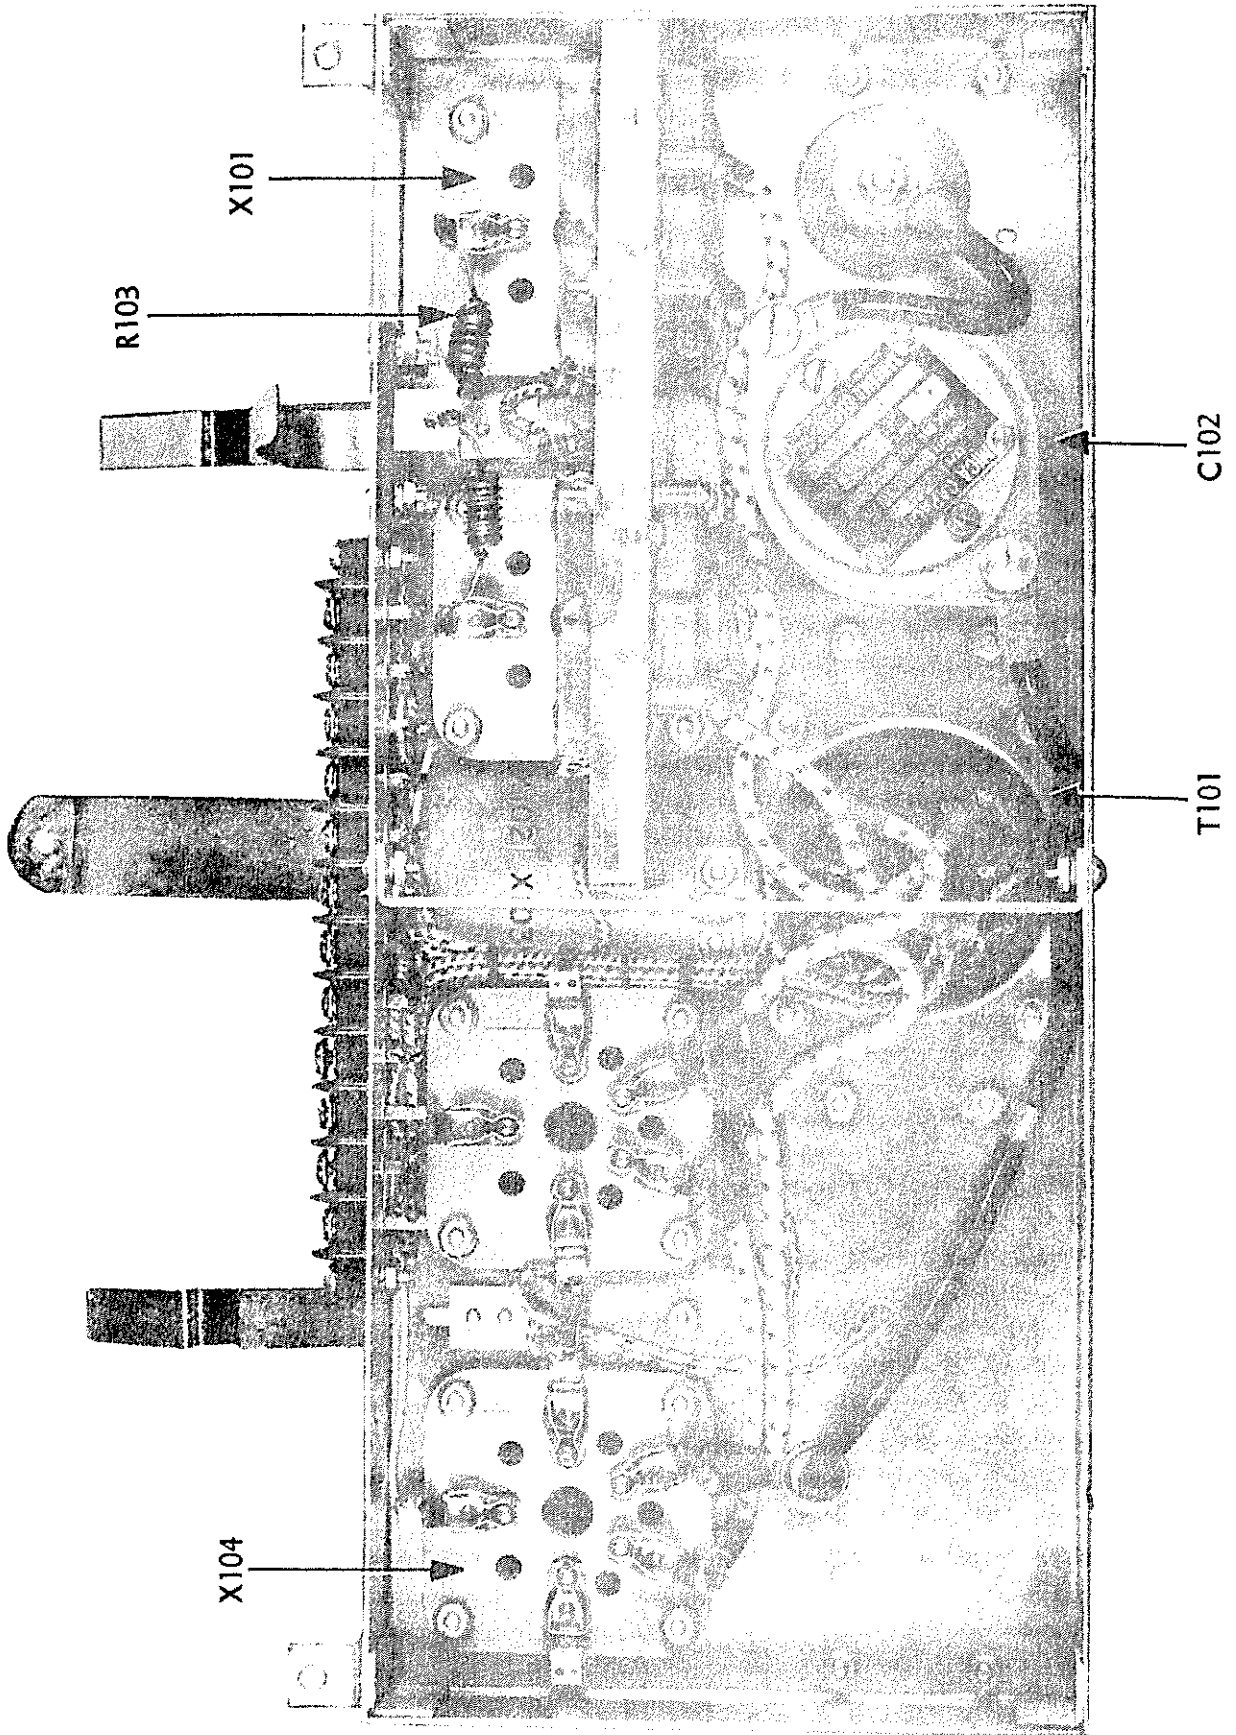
Amplifier Sub-Assembly, Bottom View, Showing Wiring
